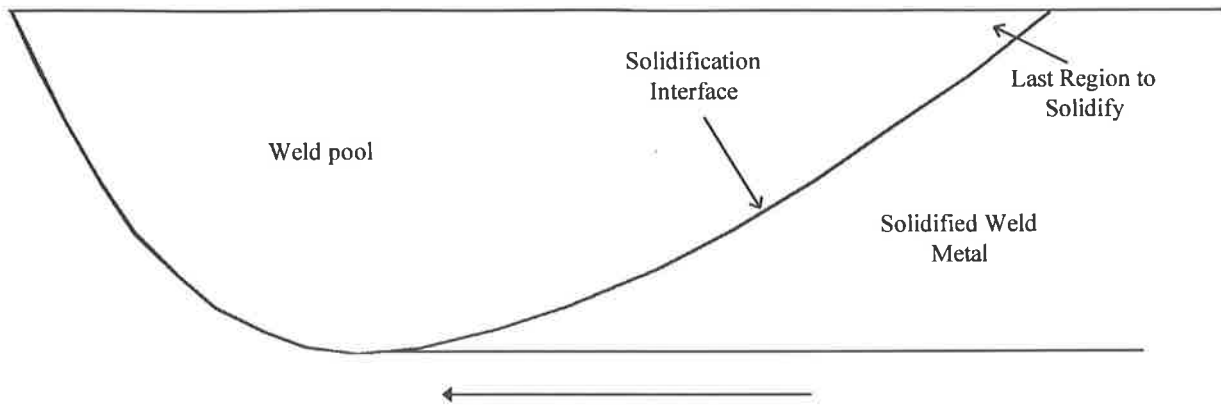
Shape of a typical longitudinal vertical section of a bead-on-plate weld pool. The arrow shows the direction of welding.
